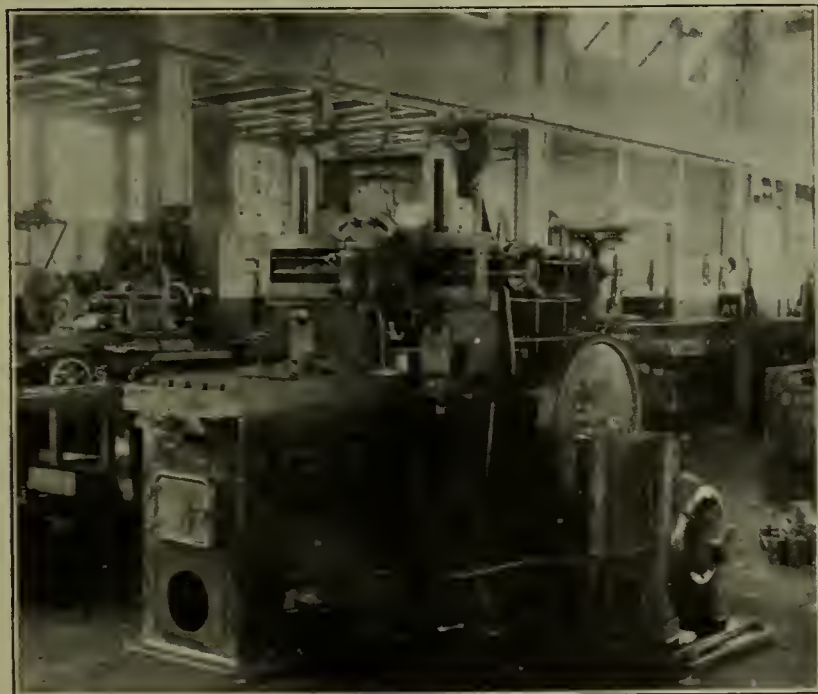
Four H. P. Motor Applied to Crank Planer.
